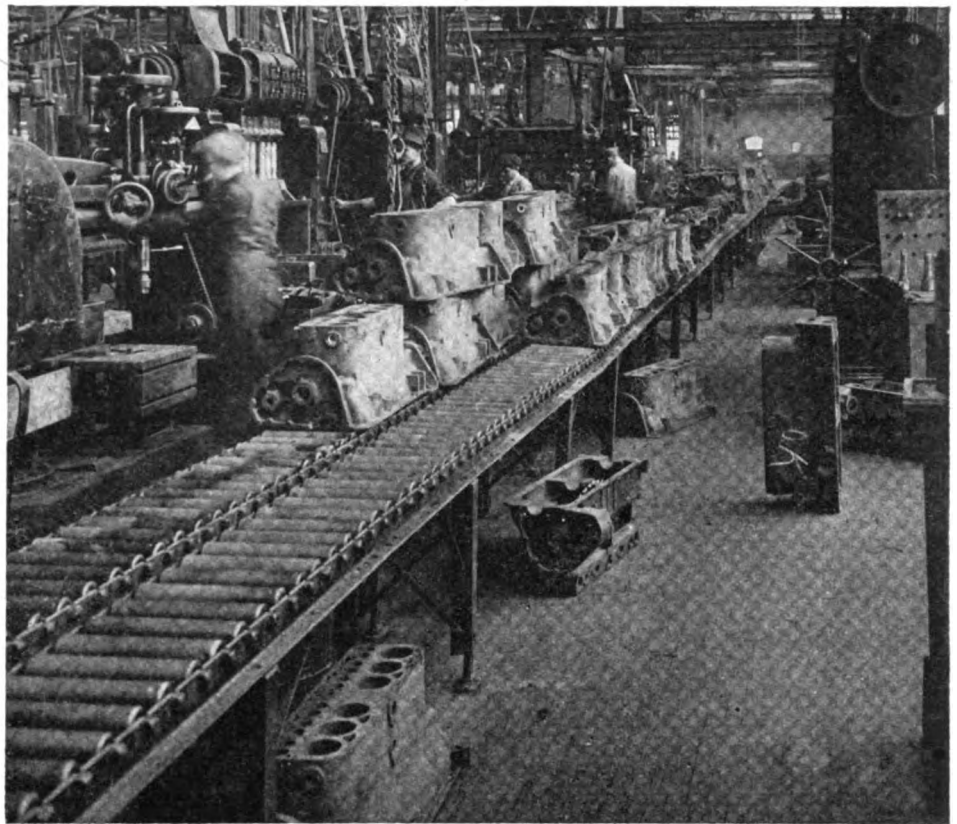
One floor of the Continental cylinder boring department, showing type of carriers for handling cylinders. This railroad extends from the first operation in the cylinder department through the cylinder grinding department and connects with the conveyors in the assembly
